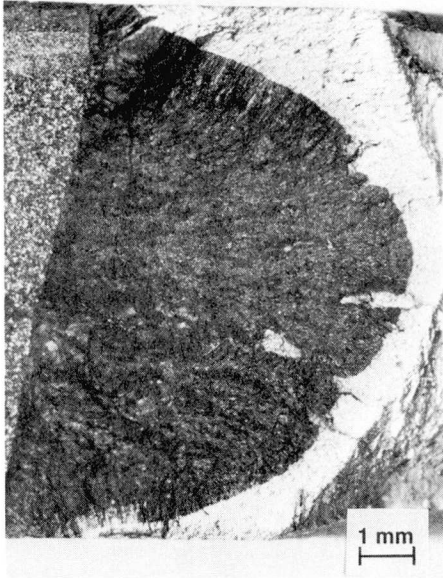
Fracture surface of a specimen with a transgranular stress corrosion crack. Surface areas from left to right: precrack, SCC area, fatigue crack in air and final rupture
